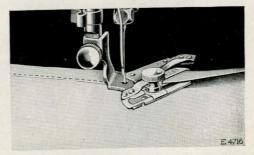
HEMMING WITH ADJUSTABLE HEMMER
